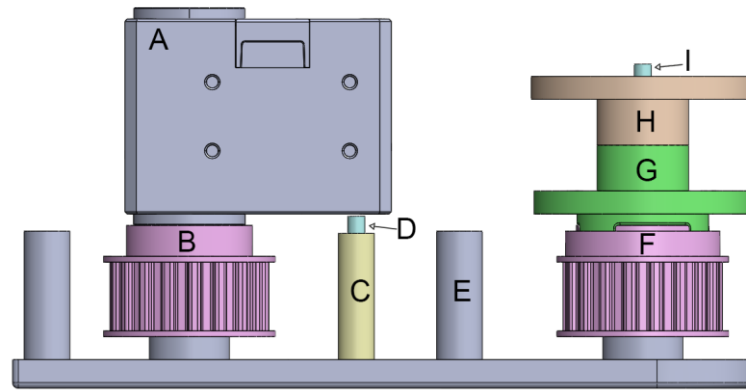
Internal finger's mechanism on the base plate. A) Engine. B) Engine Pulley. C) Tension Roller. D) Tension Roller Rod. E) Base Plate. F) Roller Pulley. G) Cap Part 1. H) Cap Part 2. I) Roller Rod.
